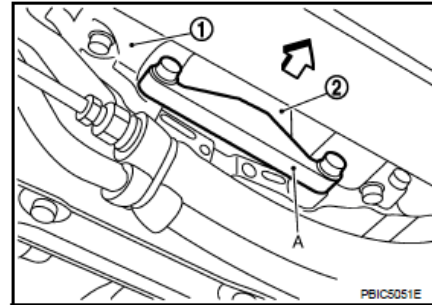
Identifying Oil Pan (Upper) And Drive Plate
